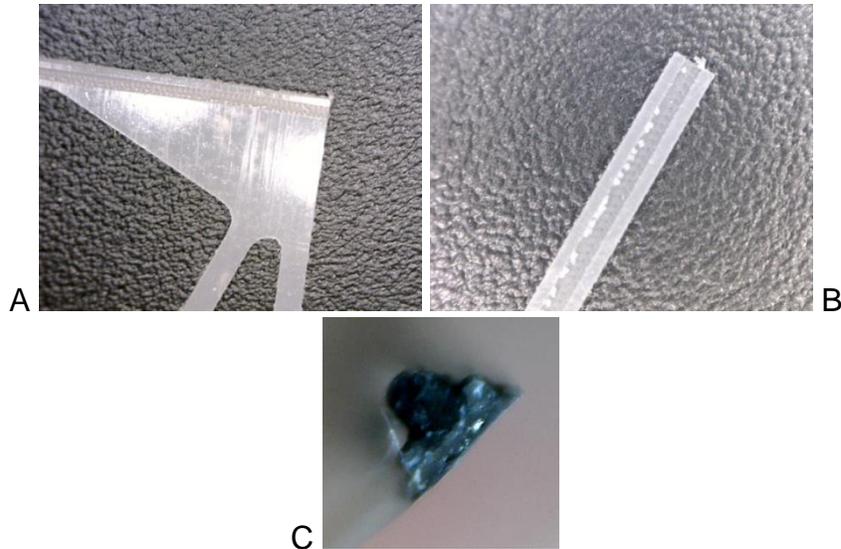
Zoomed view of the plastic frame. A) Close up of the triangular section. B) LE trough that shows the detail that can be manufactured. C) Cross section with the rod attached to the frame. Photos courtesy of Jason Rue.
